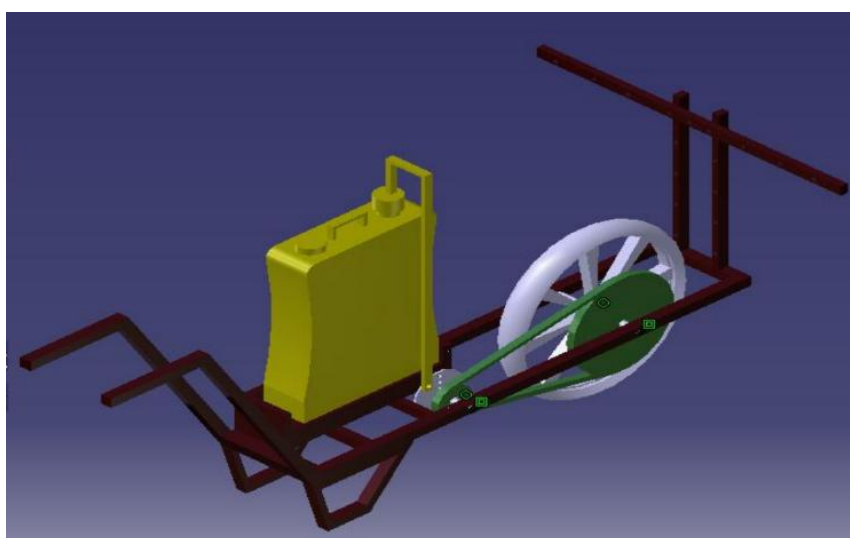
Multi-Nozzle Wheel Spray Pump.
